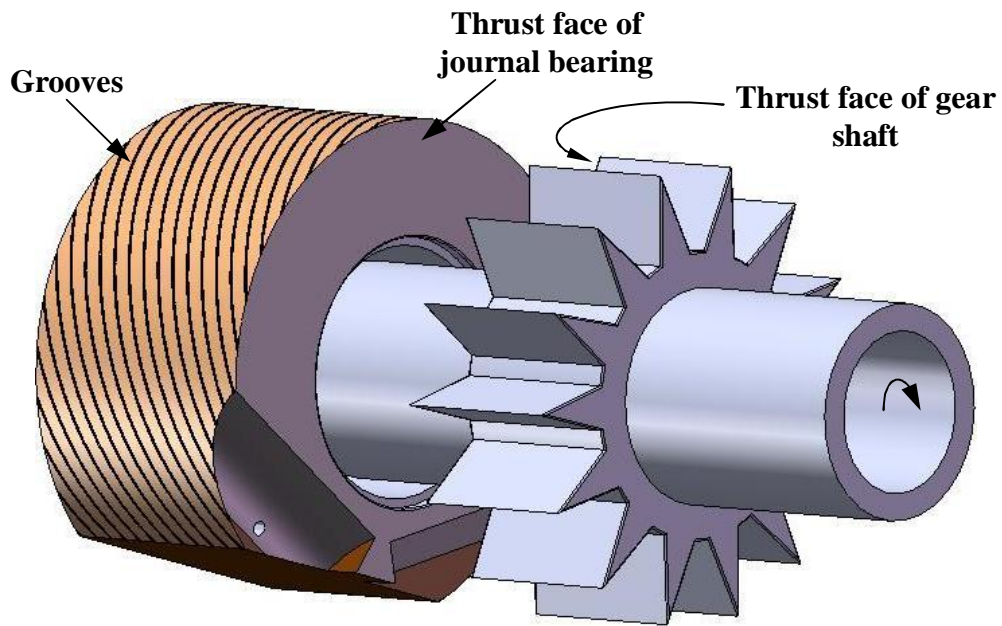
Thrust faces of journal bearing and gear shaft in fuel pump (After Goodrich Aero Engine Controls (2009)).
